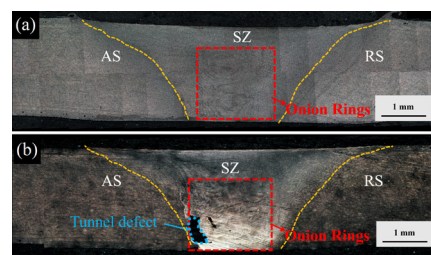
Cross-section of the FSW joints: (a) V100-w1500, (b) V500-w900
